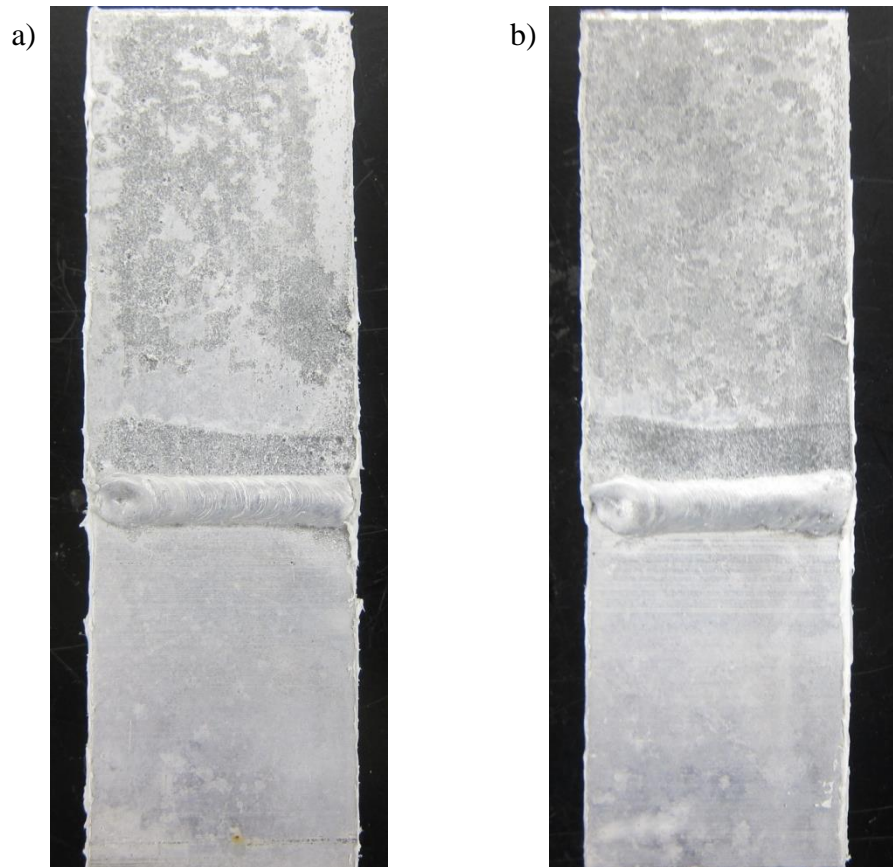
Duplicate samples of lap-joint welded configuration A3 (ER5356/AA7003/L) in the as-welded T6+PB condition.
